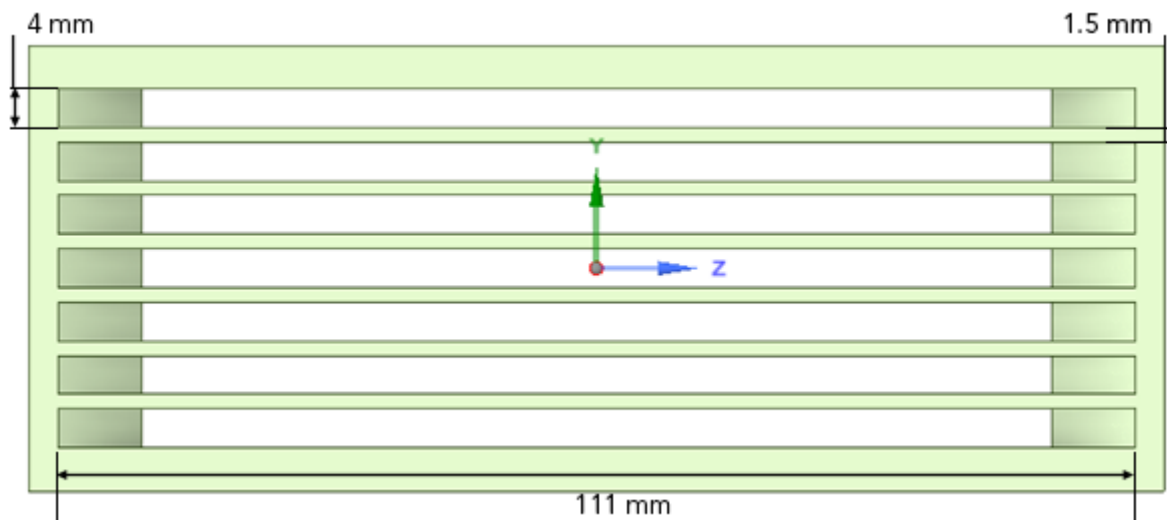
Dimensions for the Tall Stripes outlet hole pattern.
